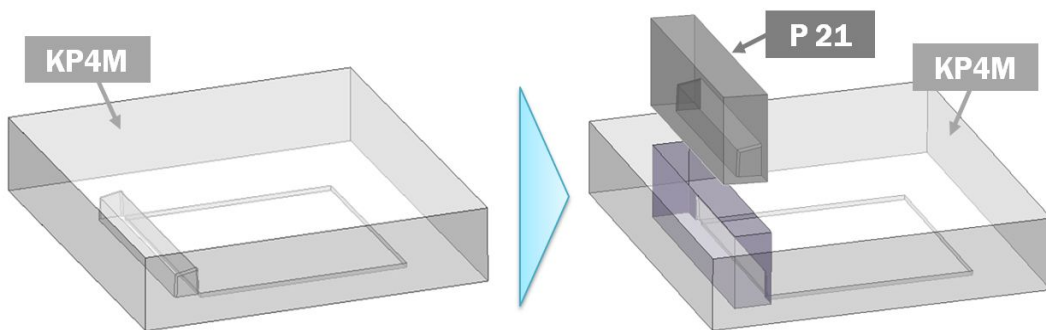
Manufacturing procedure of the mould using direct metal tooling process
